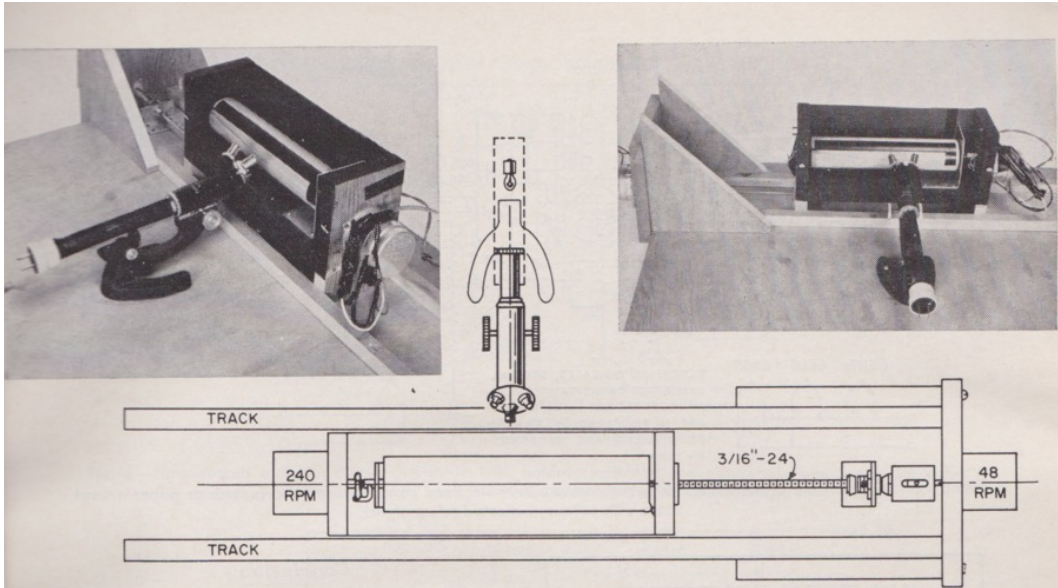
Top-view drawing of the photo-reproduction assembly. Photographs show the equipment from two different angles.
